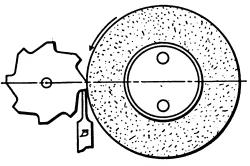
Diagram Showing Method of Grinding Reamer for Clearance
